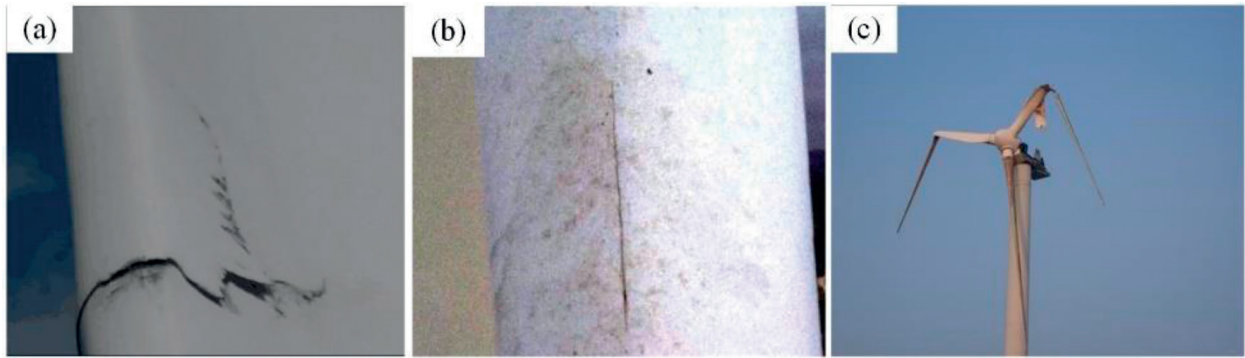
Failure modes of the blades. (a) Trailing edge crack; (b) leading edge failure and (c) blade fracture.
